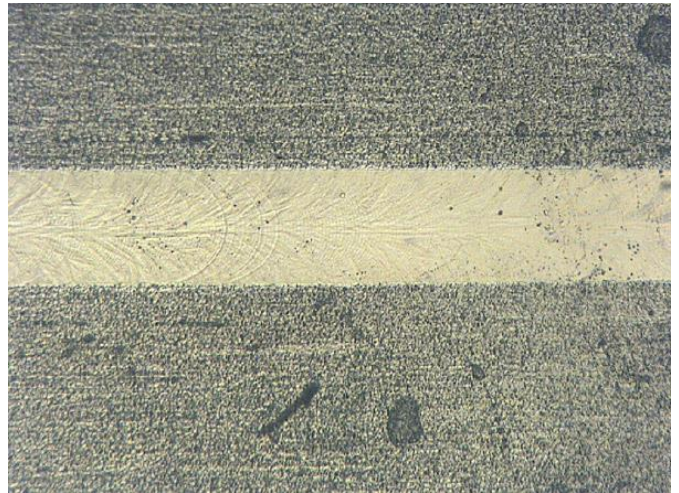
Surface quality of stainless steel weld 0.15 mm thickness
